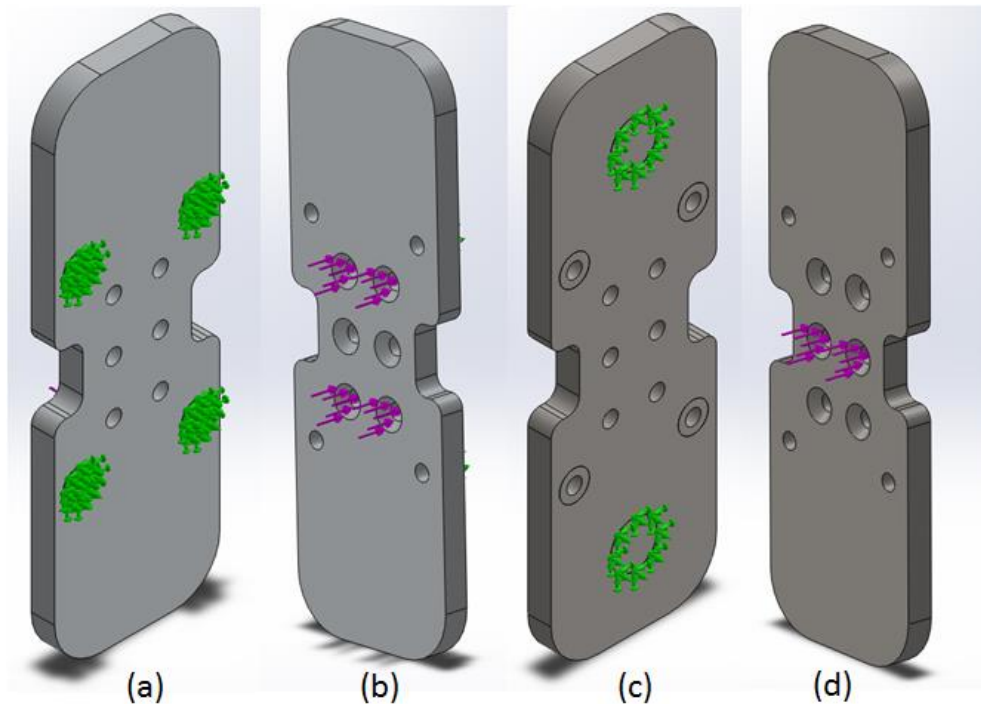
Back Plate Loading/Fixture Conditions – Parts (a) and (b) are front and back side isometric views, respectively, for the anterior fixture, while parts (b) and (c) are front and back side isometric views, respectively, for the posterior fixture.
